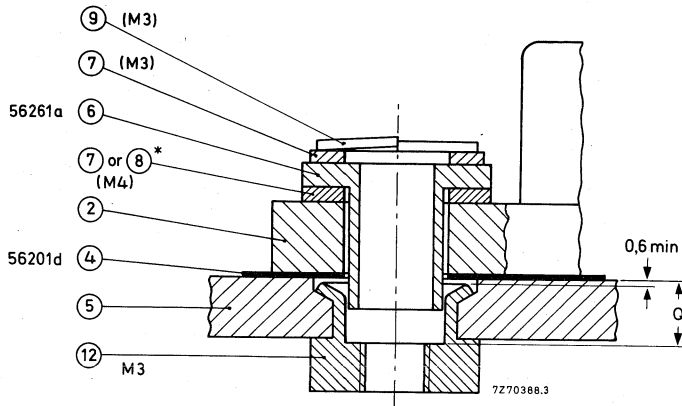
Assembly (partial) for Fig. 10 - insert nuts Q minimum 2,5 mm.
